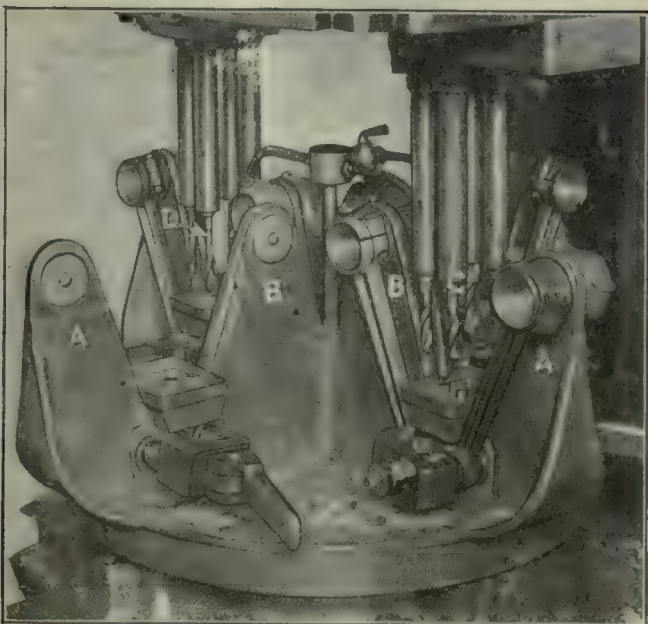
DRILLING SMALL END FOR CLAMPING SCREW
